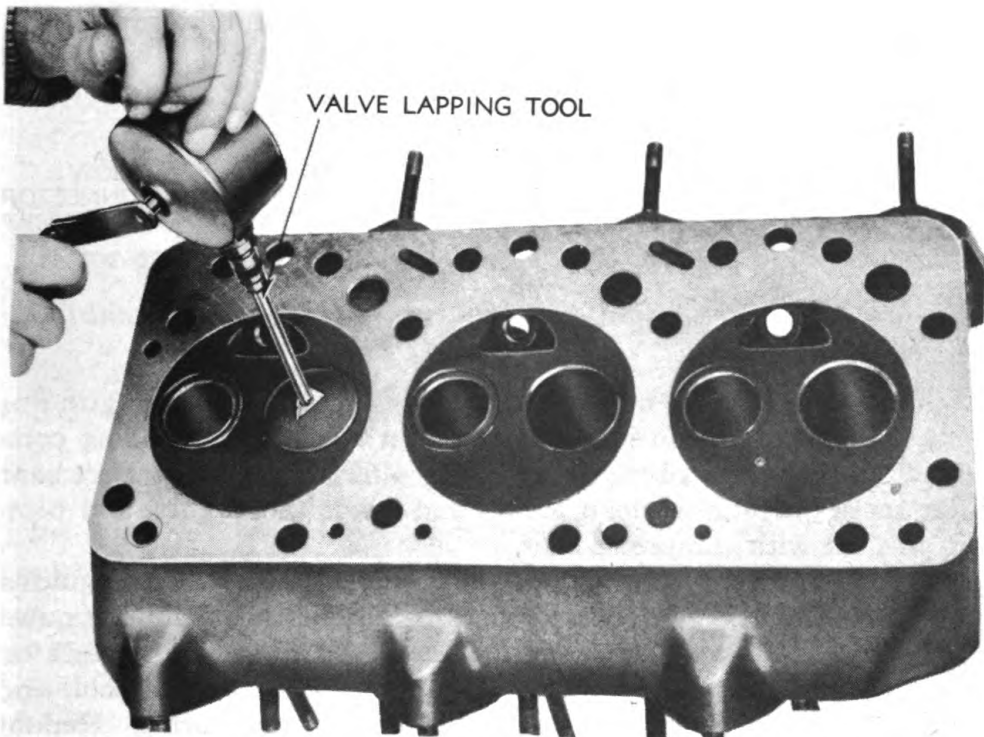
Lapping Valve Seat, Using Valve Tool Set 41-V-535
